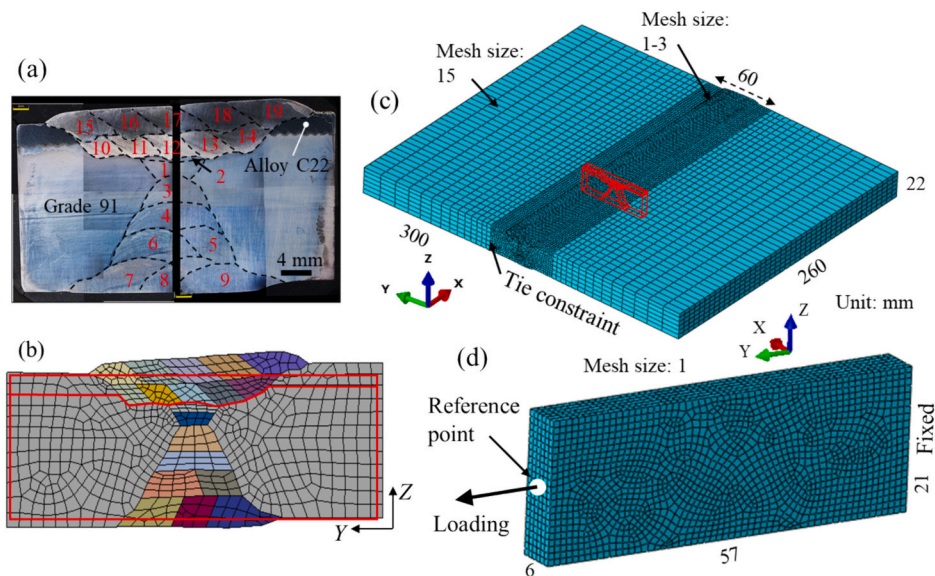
(a) Weld macrograph on the transverse cross-section, highlighting the fusion lines of individual beads. Welding analysis geometry and mesh (b) on the transverse cross-section, showing the setup of beads, and (c) in 3D view. The coordinate system was set up in such a way that the X , Y , and Z directions are aligned with the length, width and thickness direction of the weldment, respectively. (d) Tensile testing analysis geometry and mesh. The geometry corresponds to a section of the welding analysis geometry, as indicated by red boxes in b and c. (For interpretation of the references to colour in this figure legend, the reader is referred to the web version of this article.)
